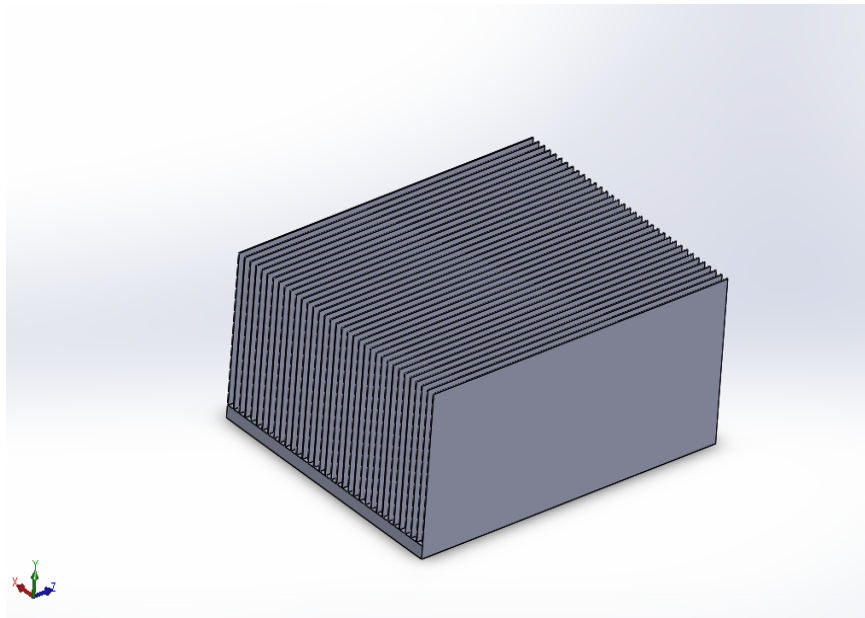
CAD model of existing Parallel Plate Heat Sink
